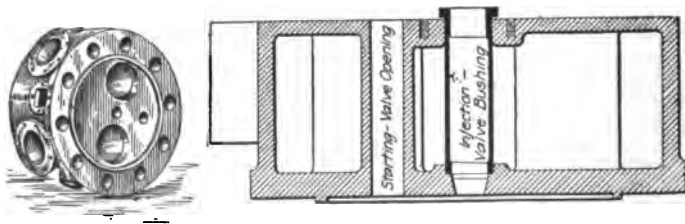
Busch-Sulzer type B Diesel cylinder head.
